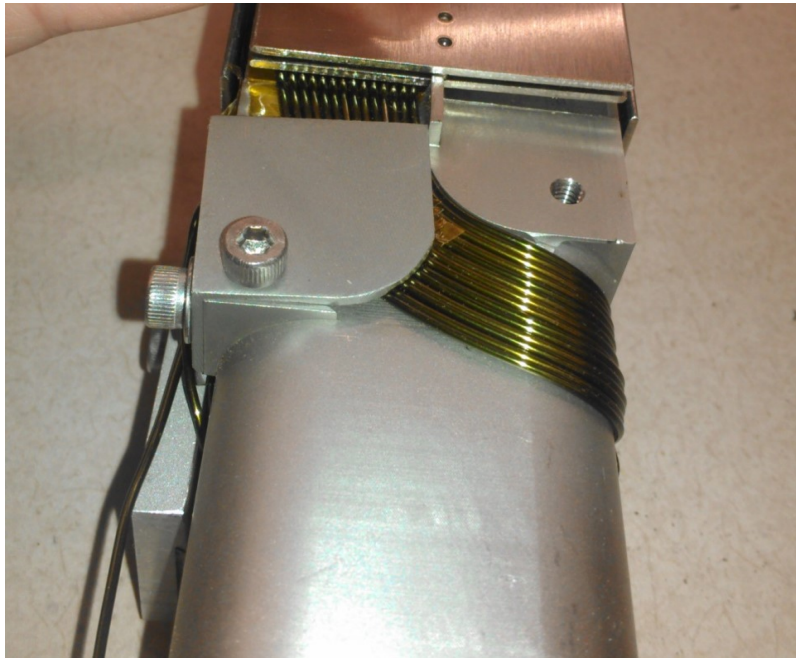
Wires held in place by a winding cookie which is screwed into the endcap and holds down the wires
